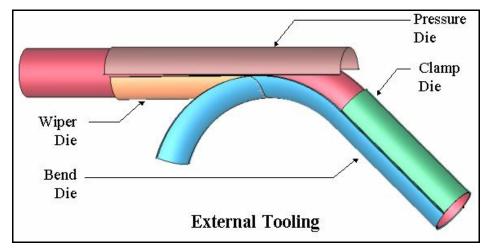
External tooling for Rotary Draw Tube Bending [3]
